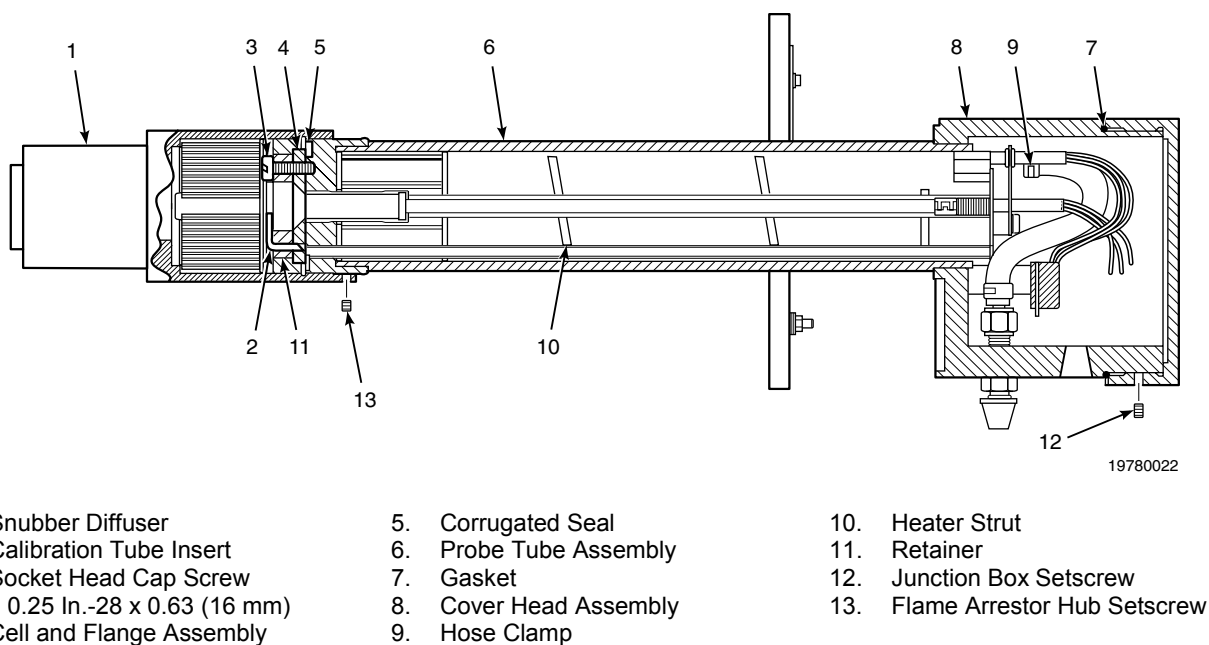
Oxygen Analyzer (Probe), Cross-Sectional View
